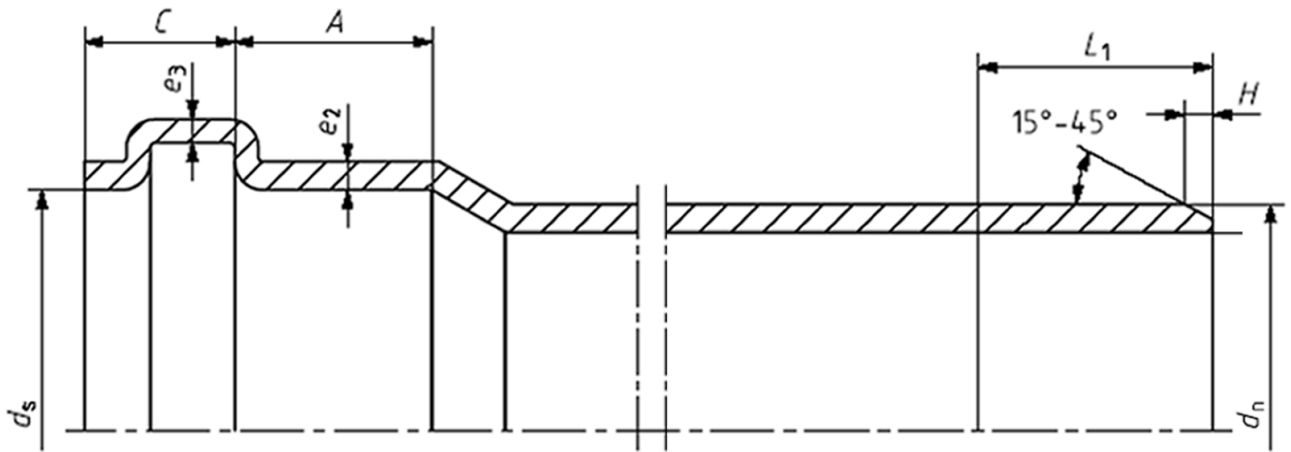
Basic dimensions of sockets and spigots for elastomeric ring seal joints
